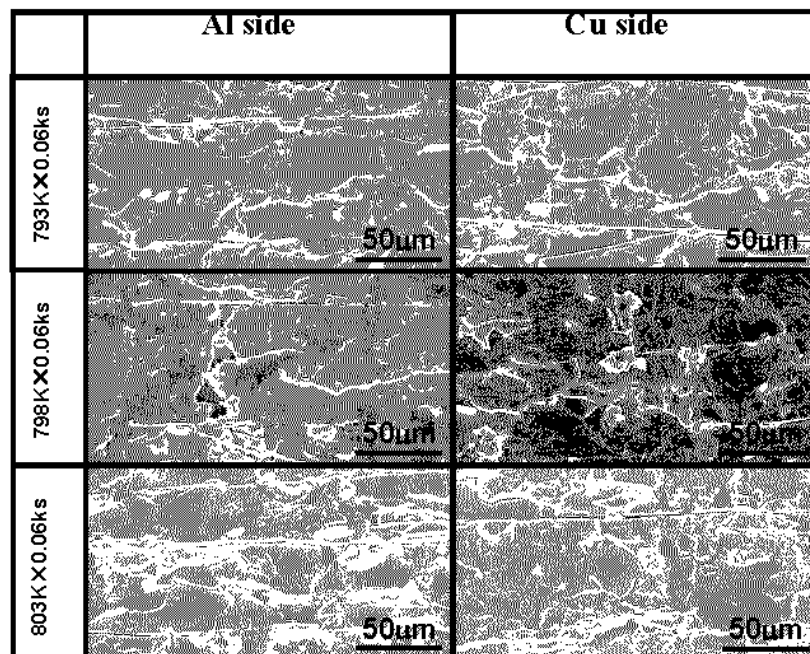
SEM image of fracture surface of Al-Cu dissimilar brazing joint specimen
